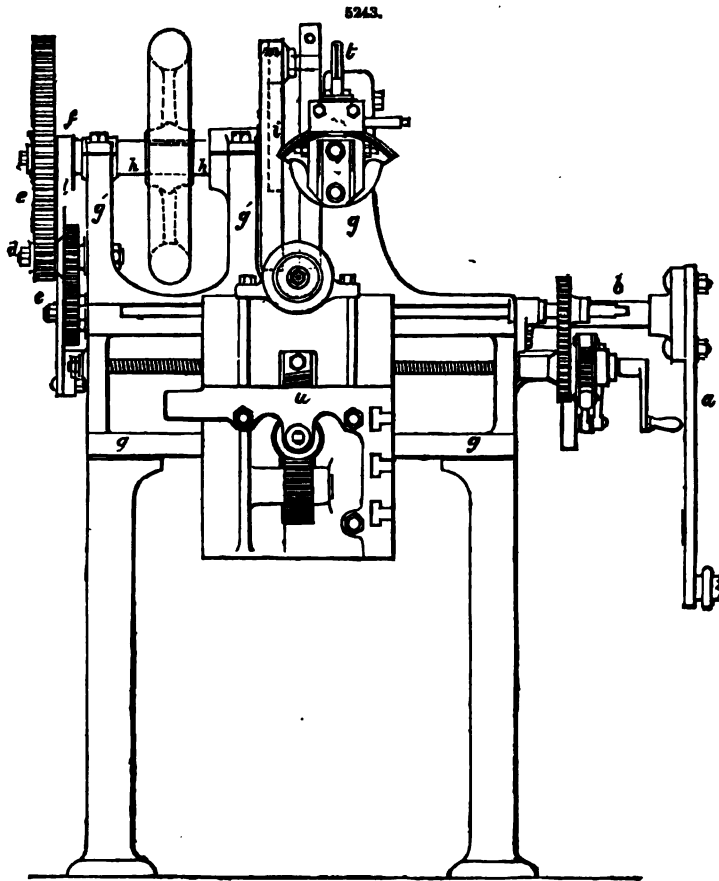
, 5243, are views of 12-in. stroke shaping machines by Wm. Muir and Co., Manchester. *a* is the handle; *b*, the driving shaft; *c*, the driving pinion gearing into the change-wheels *e e*; *ff*, bearings upon the frame *g g* carrying the shaft *h h*. Upon this shaft is cast a disc having a V slot *i*, within which is fixed a carrier stud adjustable with a V-shaped base not shown in the section. The stud works in a square slot, at right angles to the slide-bar, and it gives motion to the slide-bar; *S* is a slide-bar carrying the tool-head; *t*, adjusting screw of the tool-holder; *u*, the work table; *m*, Fig. 5242, a movable vice which can be attached to the table either on the top for light work, or at the side for long pieces of metal.
